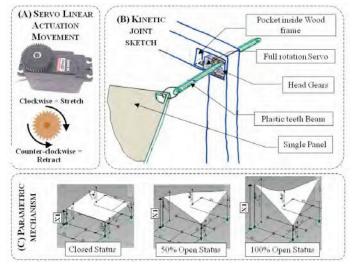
Sketch of the joint assembly idea with the motorized actuation parts.
